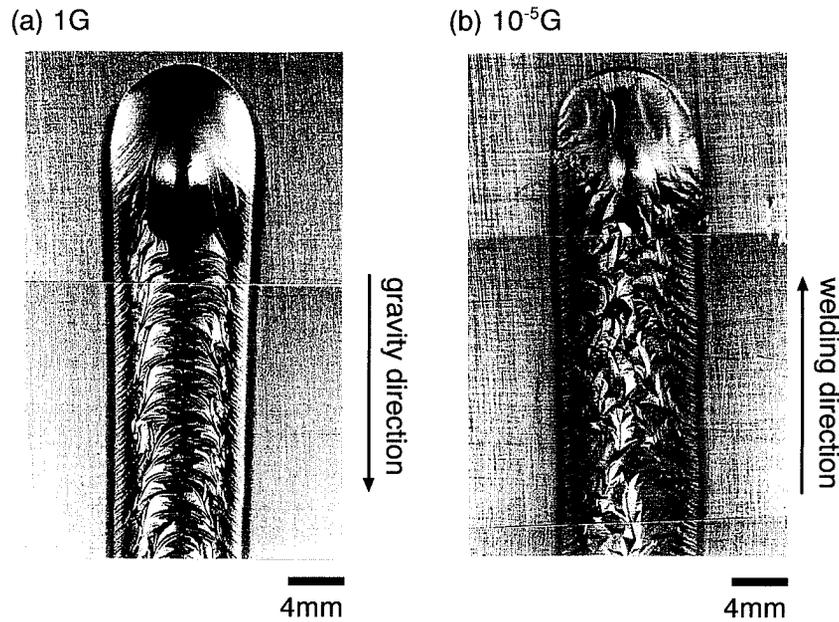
Weld bead appearances of Al alloy in vertical up welding with argon shielding gas.
